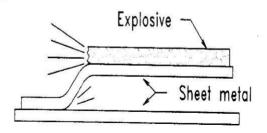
Explosion bonding [Source: "special electric machines" by Srinivasan page:1.3]
